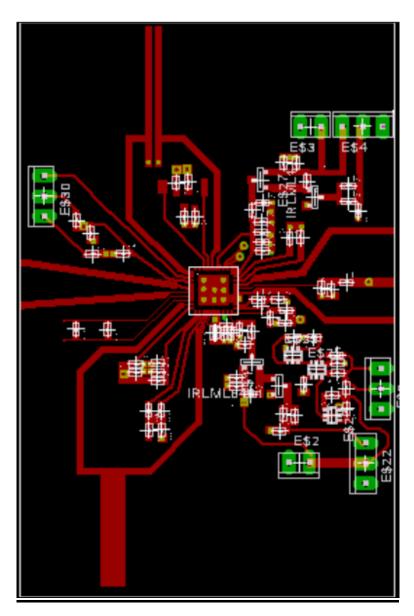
Top Layer of TRF 2436 PCB Design
